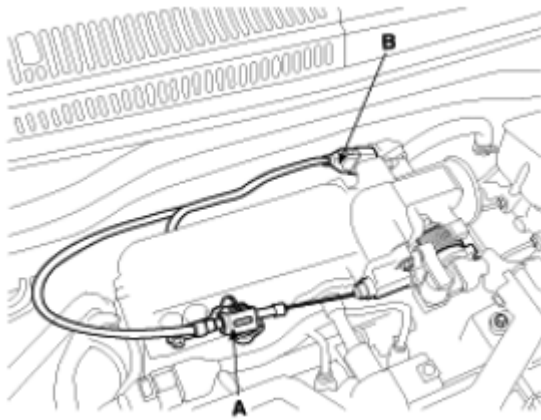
Identifying Accelerator Cable And TPS (Throttle Position Sensor) Connector
